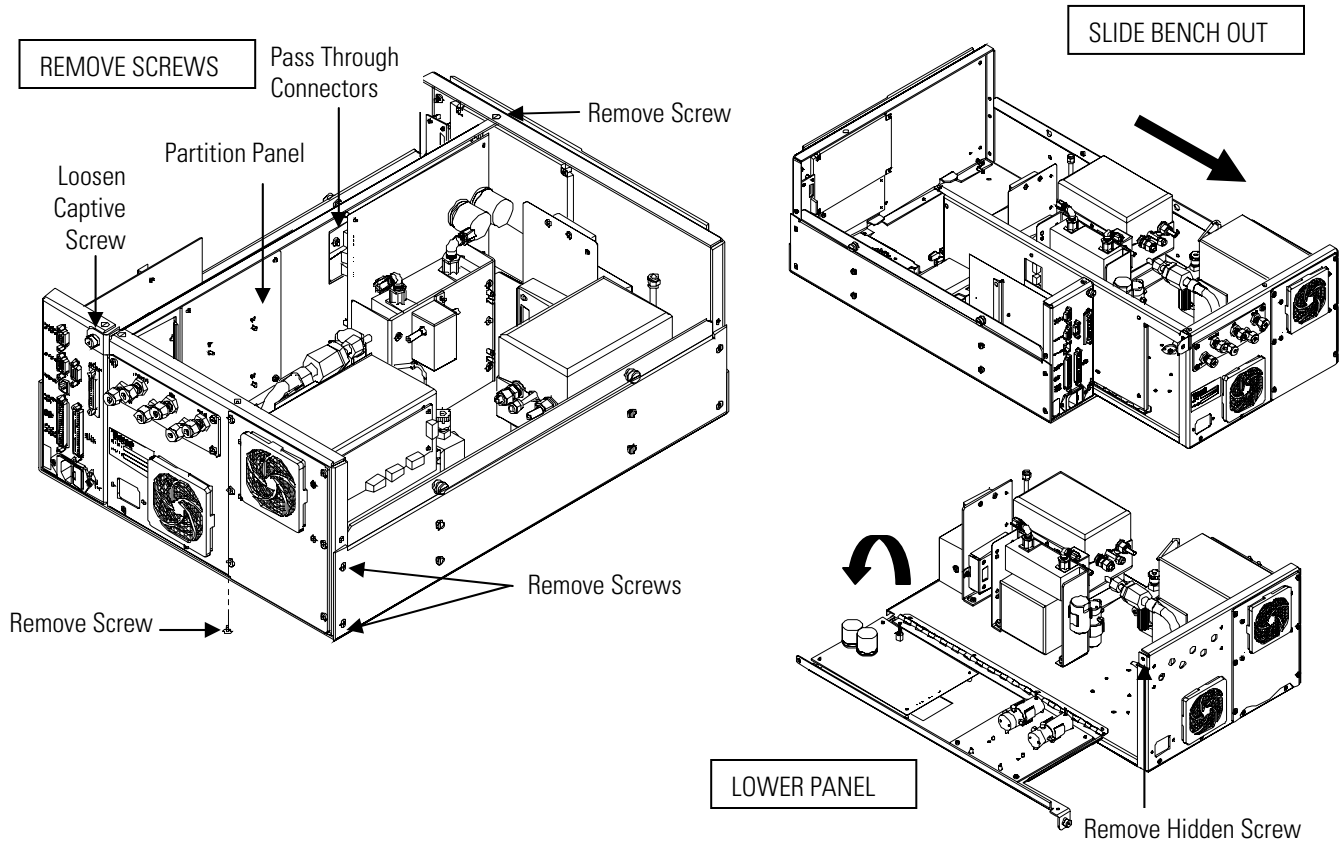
Removing the Measurement Bench and Lowering the Partition Panel
